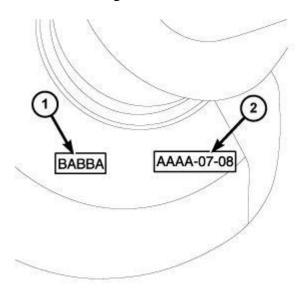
Main Bearing Size Mark On Crank Courtesy of CHRYSLER LLC
